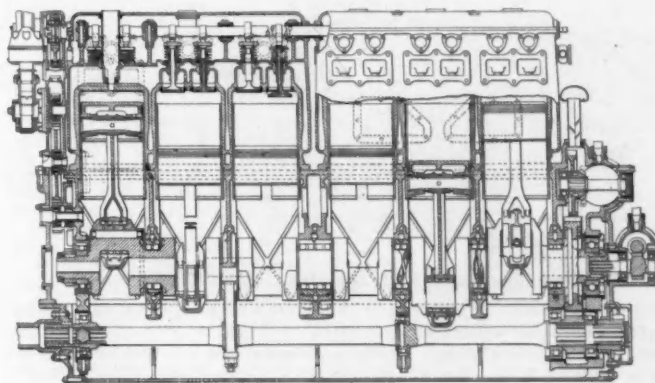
LONGITUDINAL SECTION THROUGH FORWARD ENGINE
